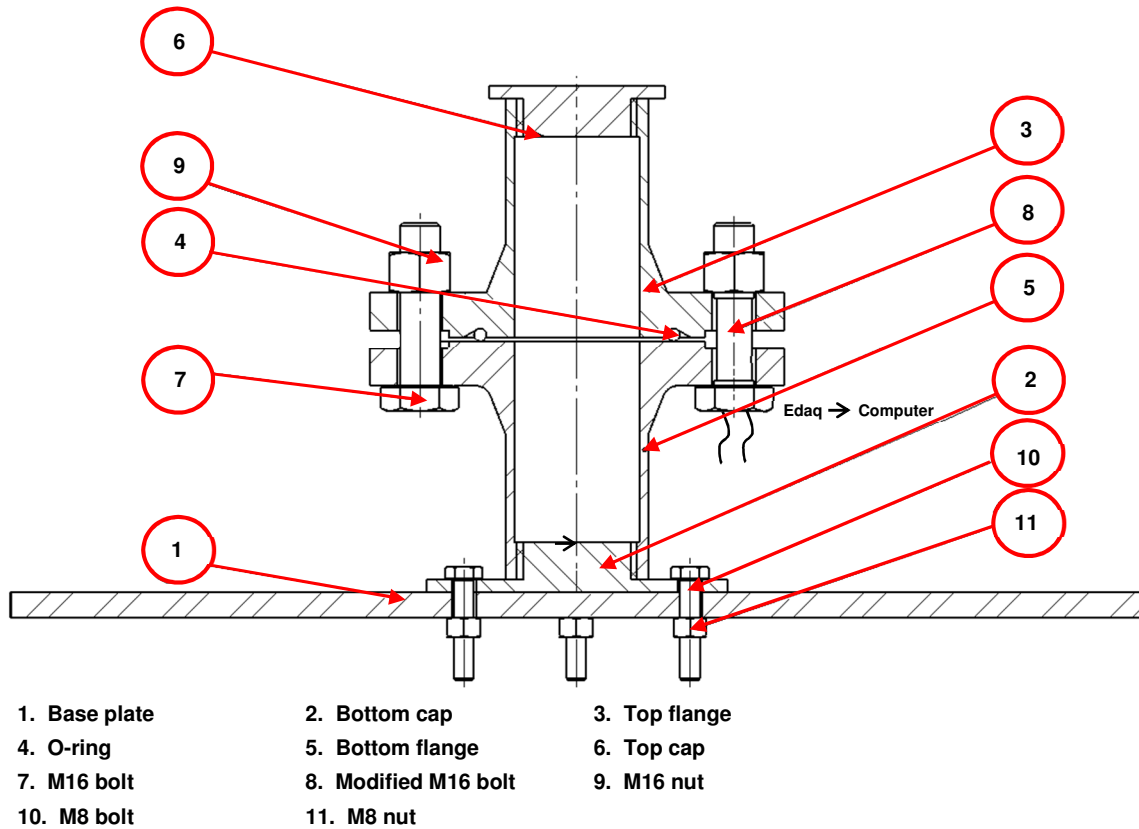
Experimental setup for the raised face flange which has been modified to contain an O-ring groove
